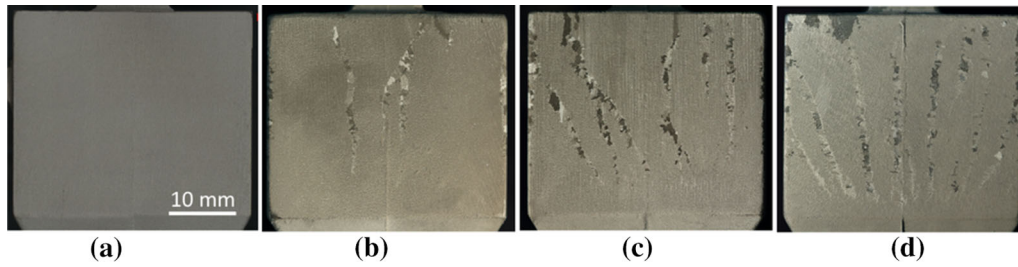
Representative examples of castings with (a) tight baffle on no freckle chain defects and (b) through (d) open baffle with 3, 6, and 11 freckle chains, respectively.
